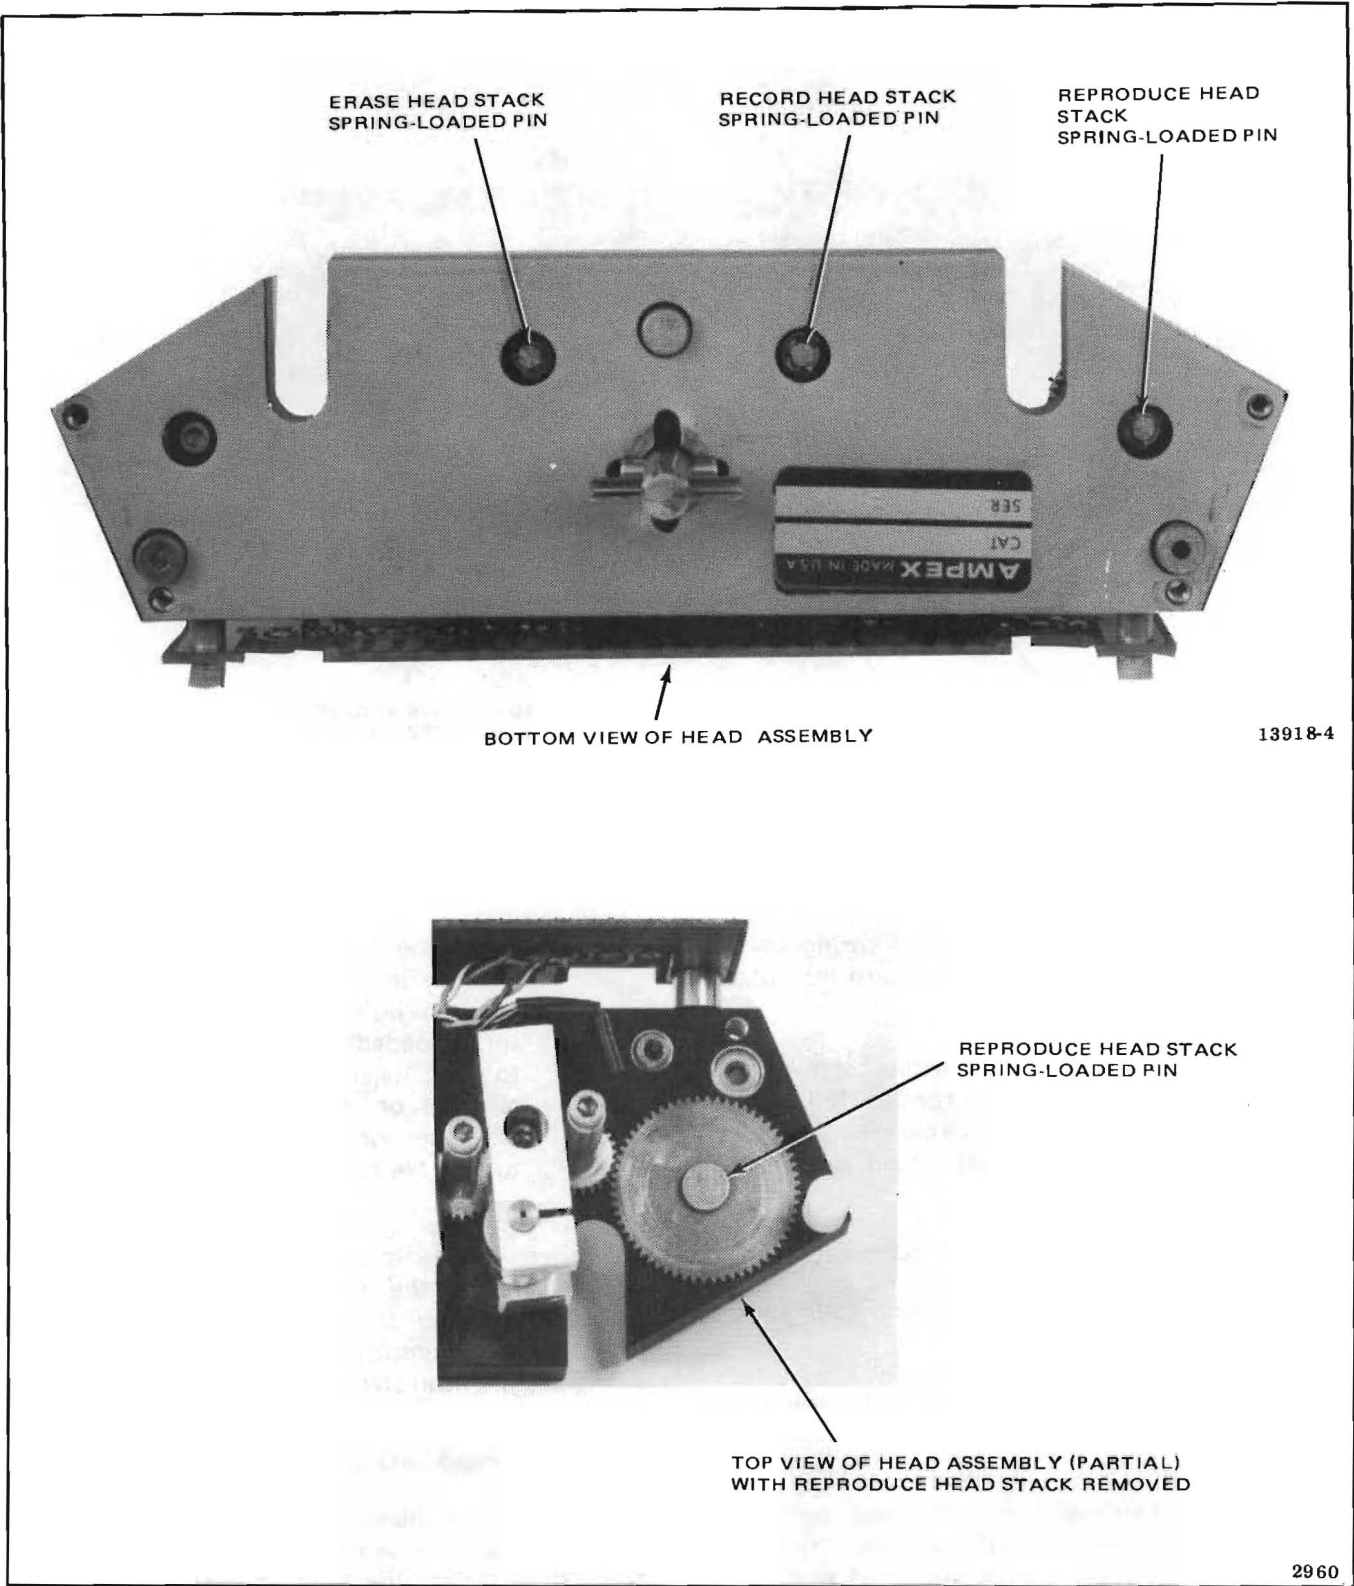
Head Assembly Spring Loaded Pin Locations, Main Head Shield Removed
